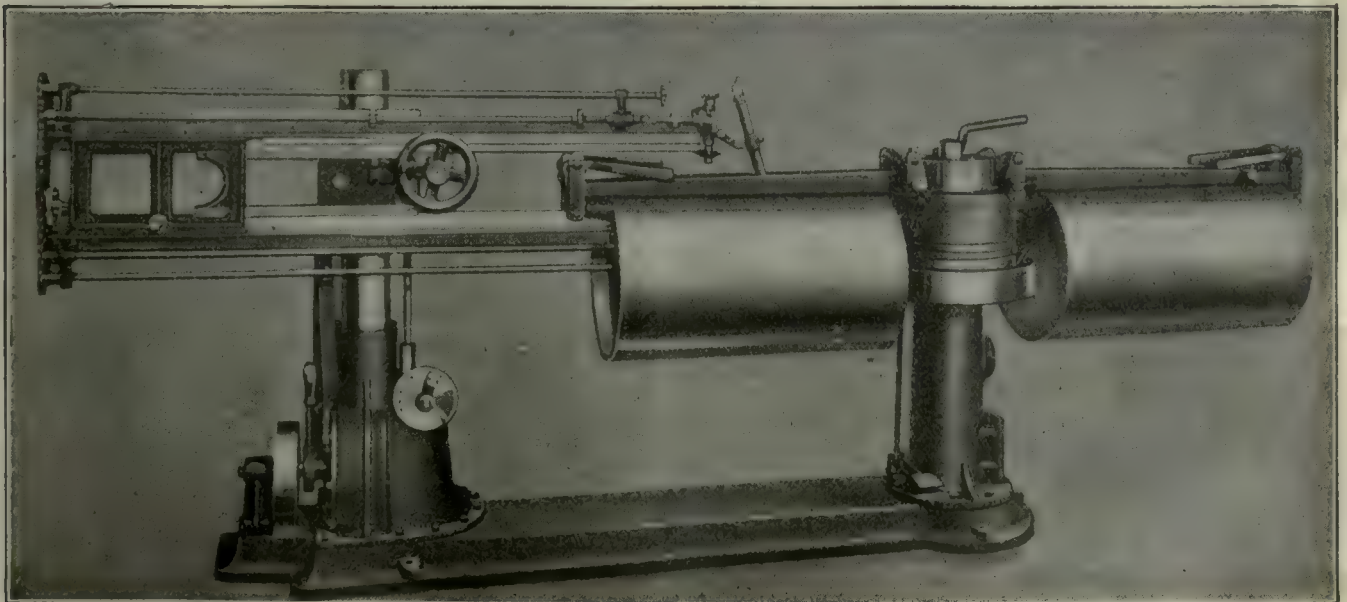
DAVIS-BOURNONVILLE DUOGRAPH WELDING MACHINE
